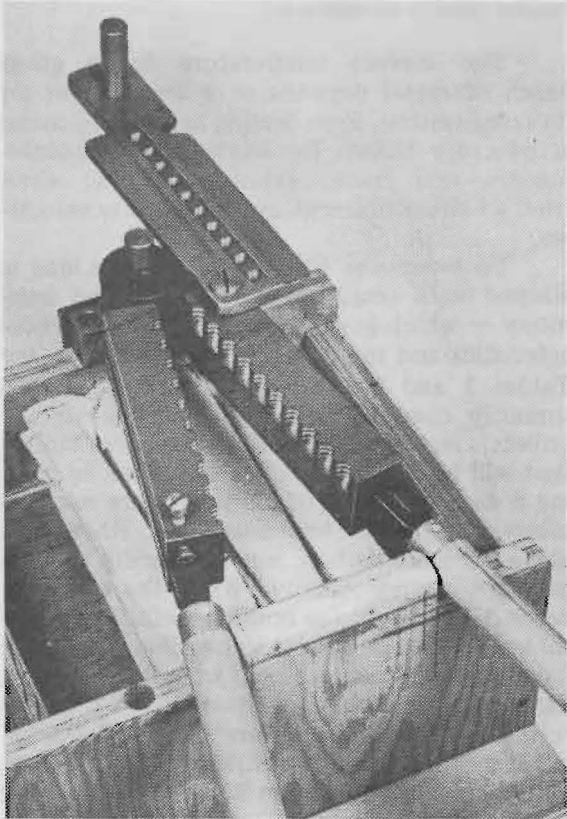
A casting box, as shown, supports the mold during pouring and contains padded material which prevents deforming of the bullets when they drop out of the mold.
